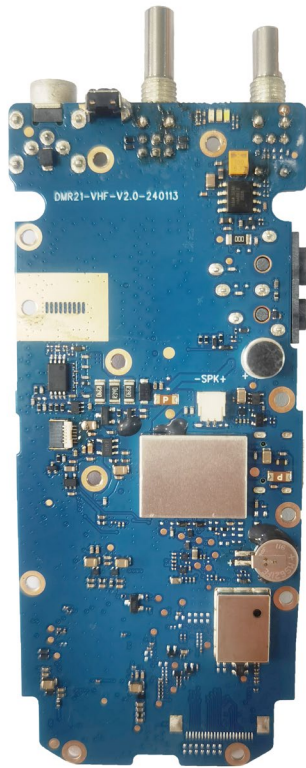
E - RF boards with chassis and housing for (Front Side)
